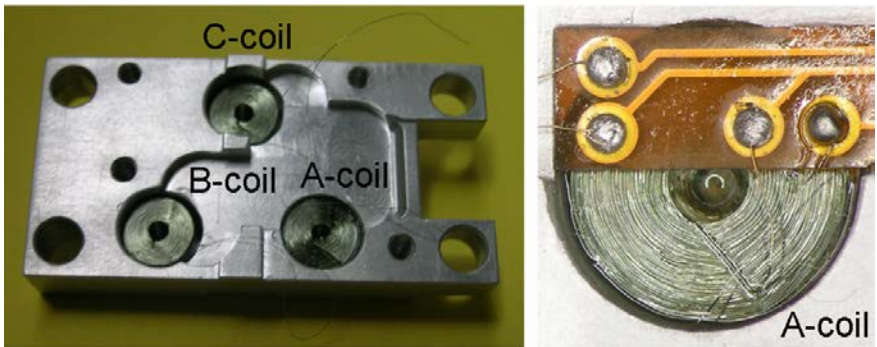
Left) Bottom view of the scanner main part with the A-, B- and C-coils inserted in their respective hole. Right) Larger view of the A-coil with its two connections to the flexprint pads. The two pads on the upper left of the image stood for the B-coil.
